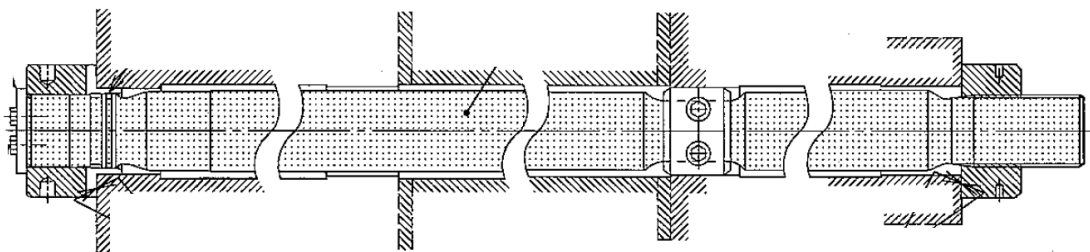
Anchor bolt of the 6DKRN 80/230 engine
